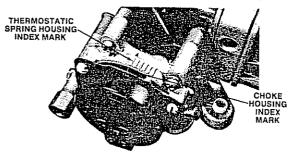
MODEL 2300 AUTOMATIC CHOKE THERMOSTATIC SPRING HOUSING ADJUSTMENT
